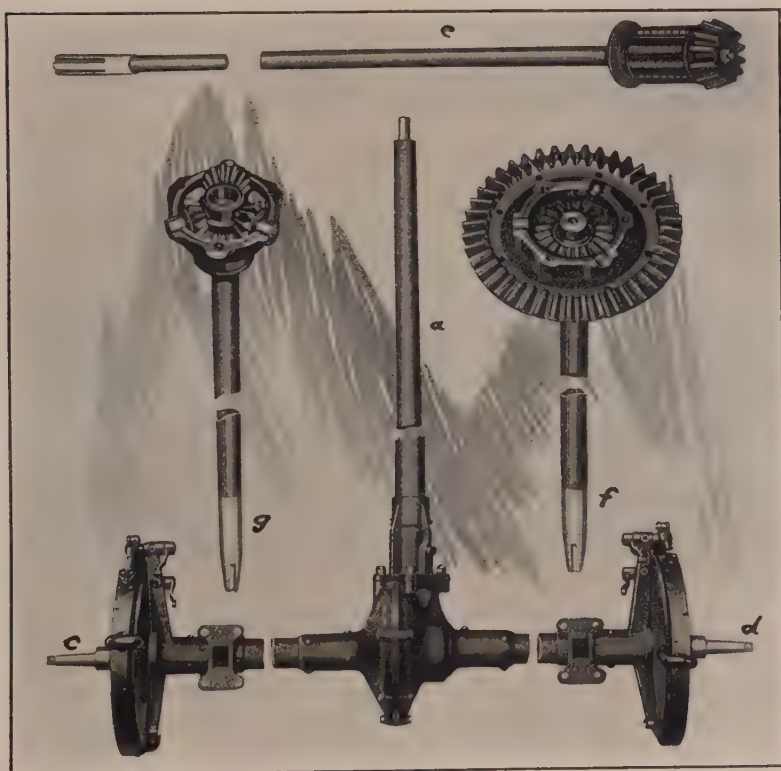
Maxwell straight bevel drive and rear-axle construction.
